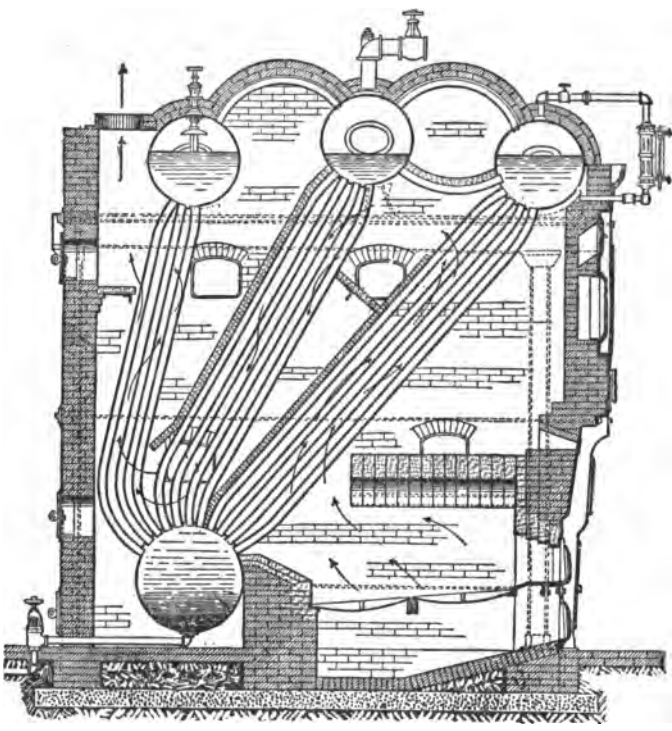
Sectional View of Stirling Boiler — side Elevation
